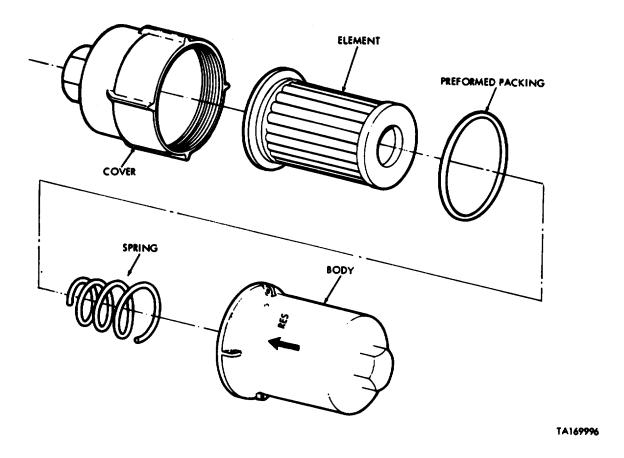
Disassembly or assembly of hydraulic reservoir air vent line filter.
